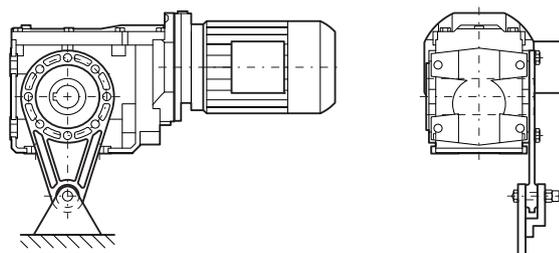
Mounting suggestion for torque arms on bevel gearbox B
